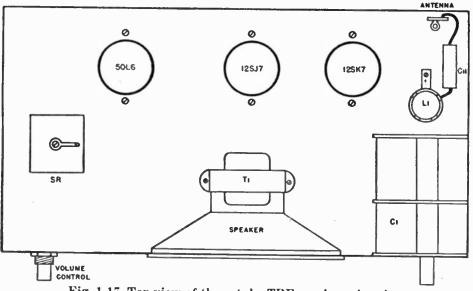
Top view of three-tube TRF receiver chassis.
